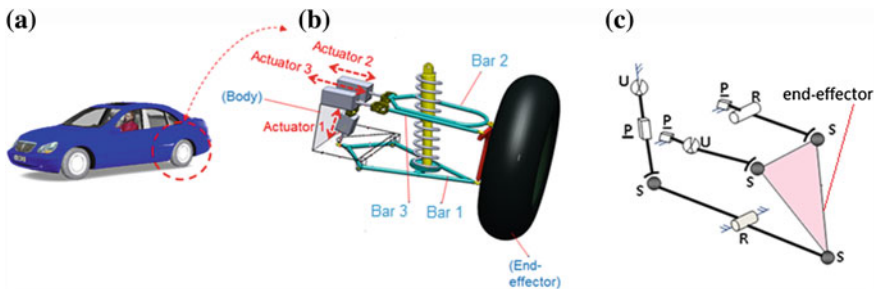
a Mechanism in the vehicle; b Mechanism CAD model; c Kinematic scheme [2]
